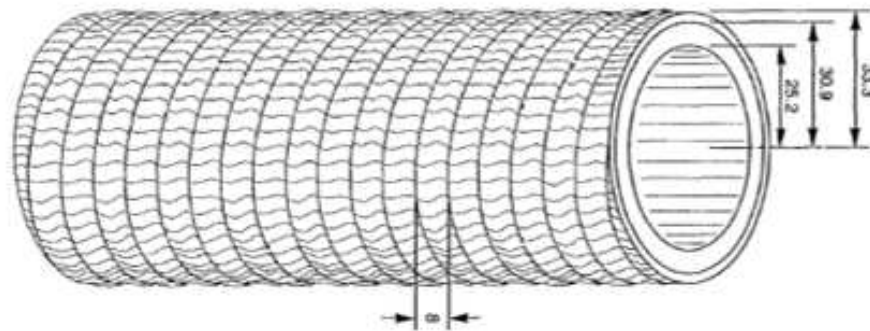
Schematic diagram of spiral weld overlaid tube [36].
